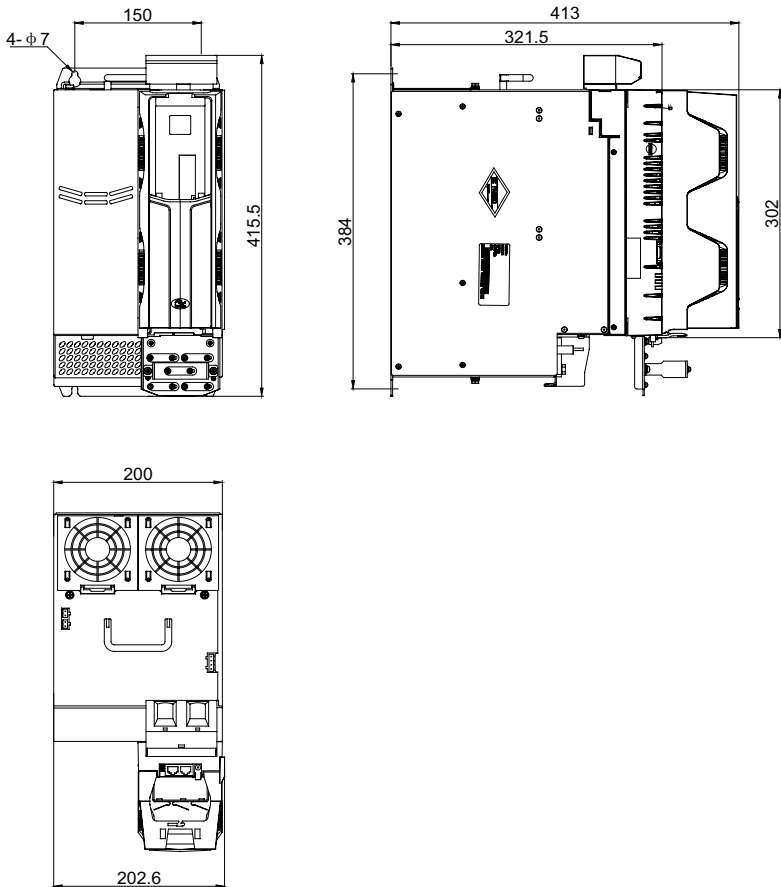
Outline dimensions of H4 DC choppers (mm)
